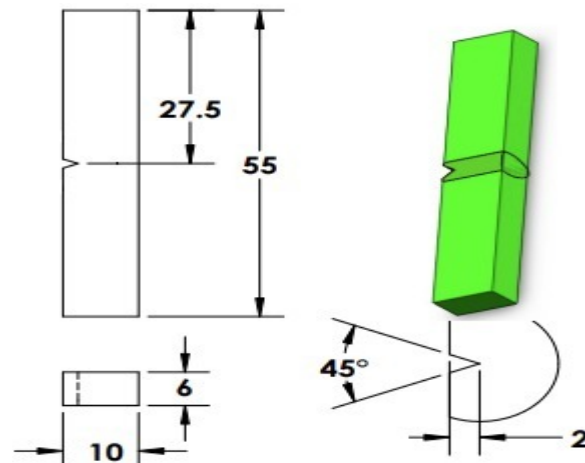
Sample for impact test “V” notch in the fusion zone (FZ) of TIG and ATIG Welded.
